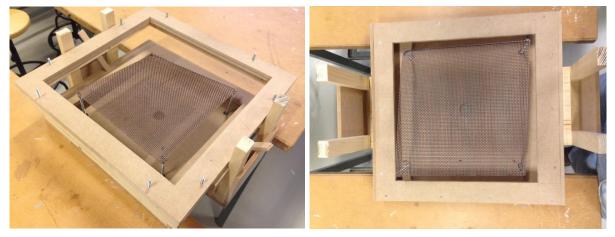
Custom-made vacuum forming machine & Figure 57b: Top view of the vacuum forming machine
